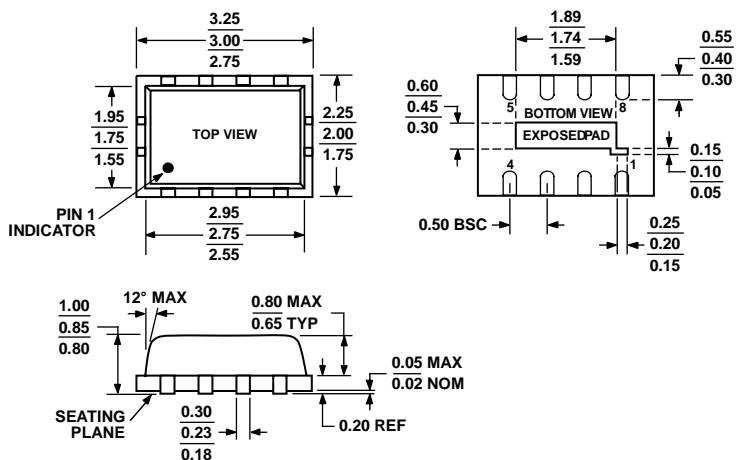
8-Lead Lead Frame Chip Scale Package [LFCSP_VD]
